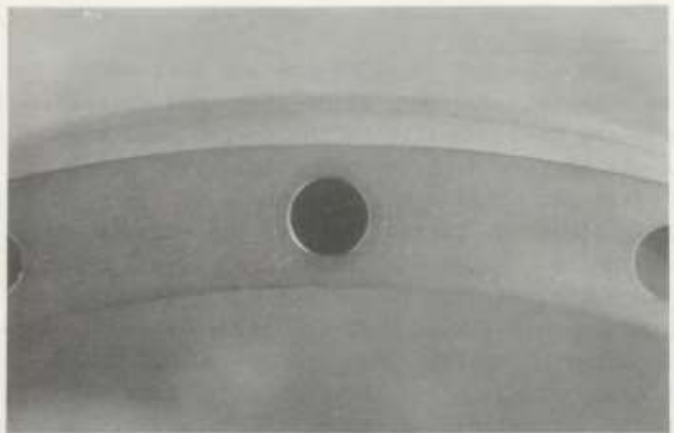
(b) Crack repaired and sleeve installed in compressor spacer
